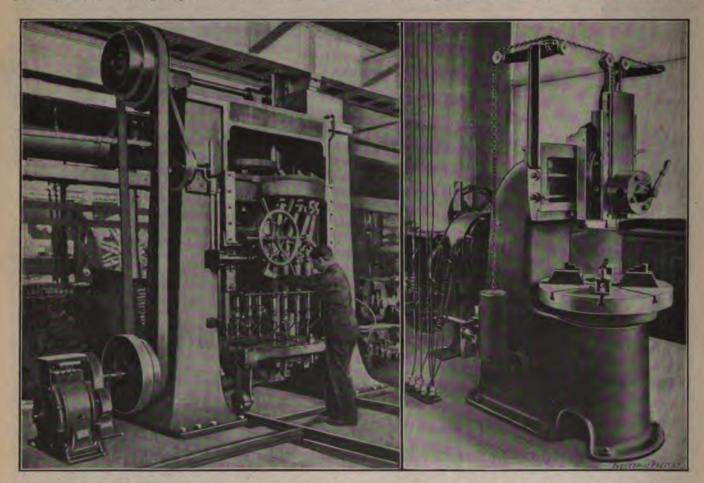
Example of Jig Work with Motor-driven Multiple-spindle Drill.
